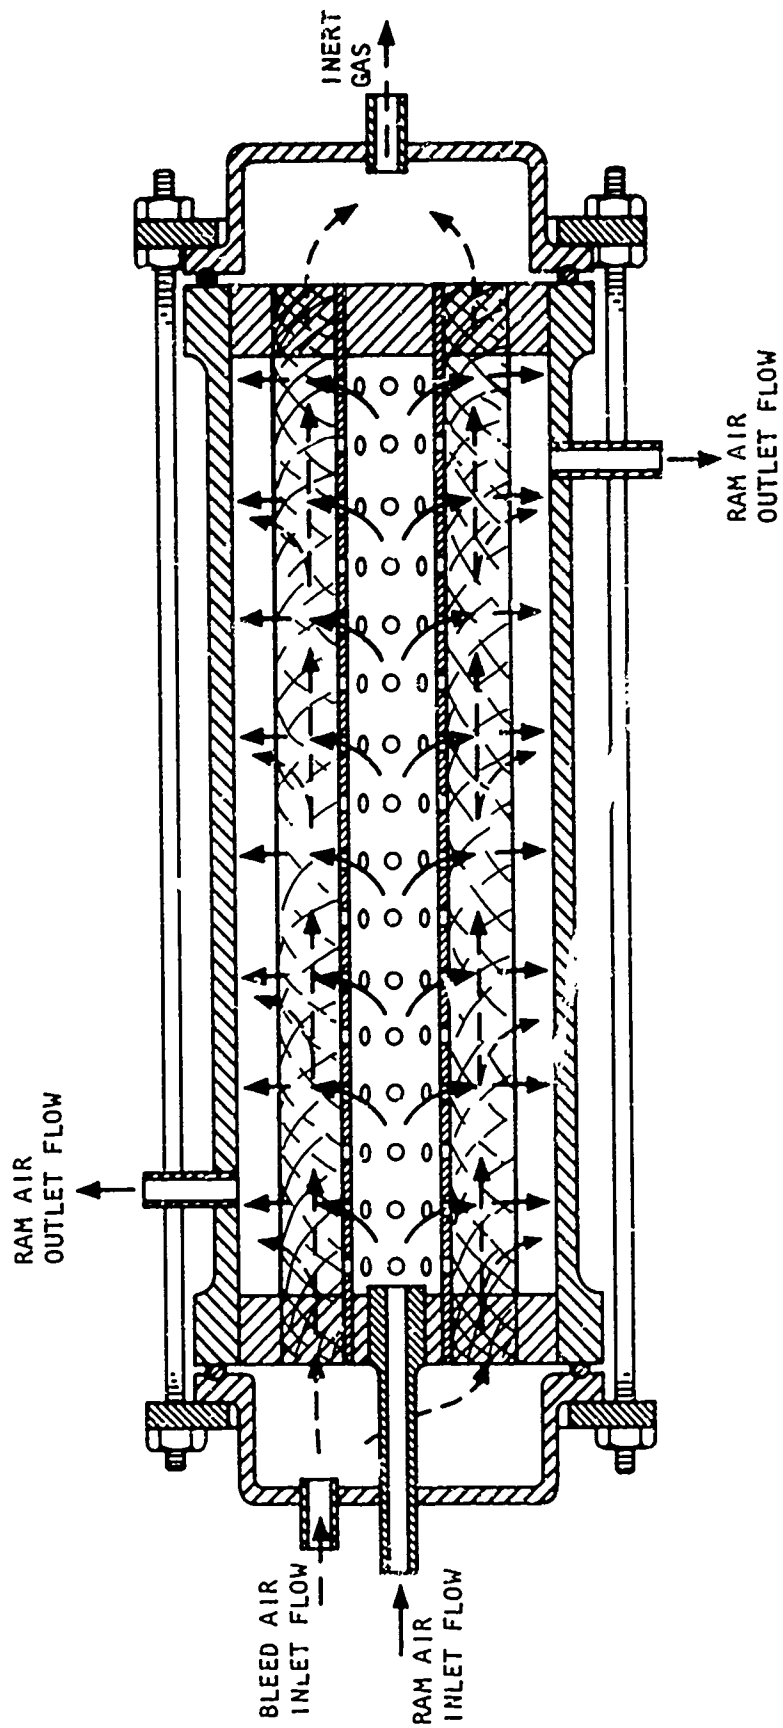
Small Spiral Wrapped Test Module Overall Assembled View
